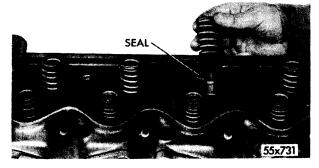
Installing Intake Valve Spring, Stem Seal and Retainer
